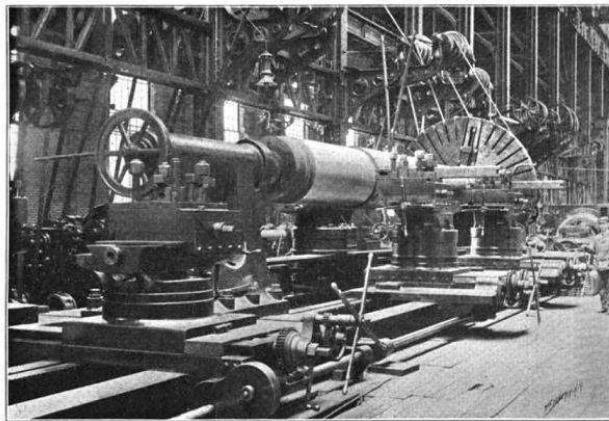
Screw-cutting engine lathe in "machine shop No. 2," for turning heavy guns and shafts. Face plate 120 inches in diameter and swing over shears 130 inches by 76 feet. It is geared for turning lathes from one in ten to one in four, and there are four carriages with compound rests. Besides this lathe there are five in the shop, with 120-inch face plates and of 100-inch swing. The shaft shown in the lathe weighs 65,000 pounds and is 37 inches diameter at the center and 27 feet 4 inches long.
